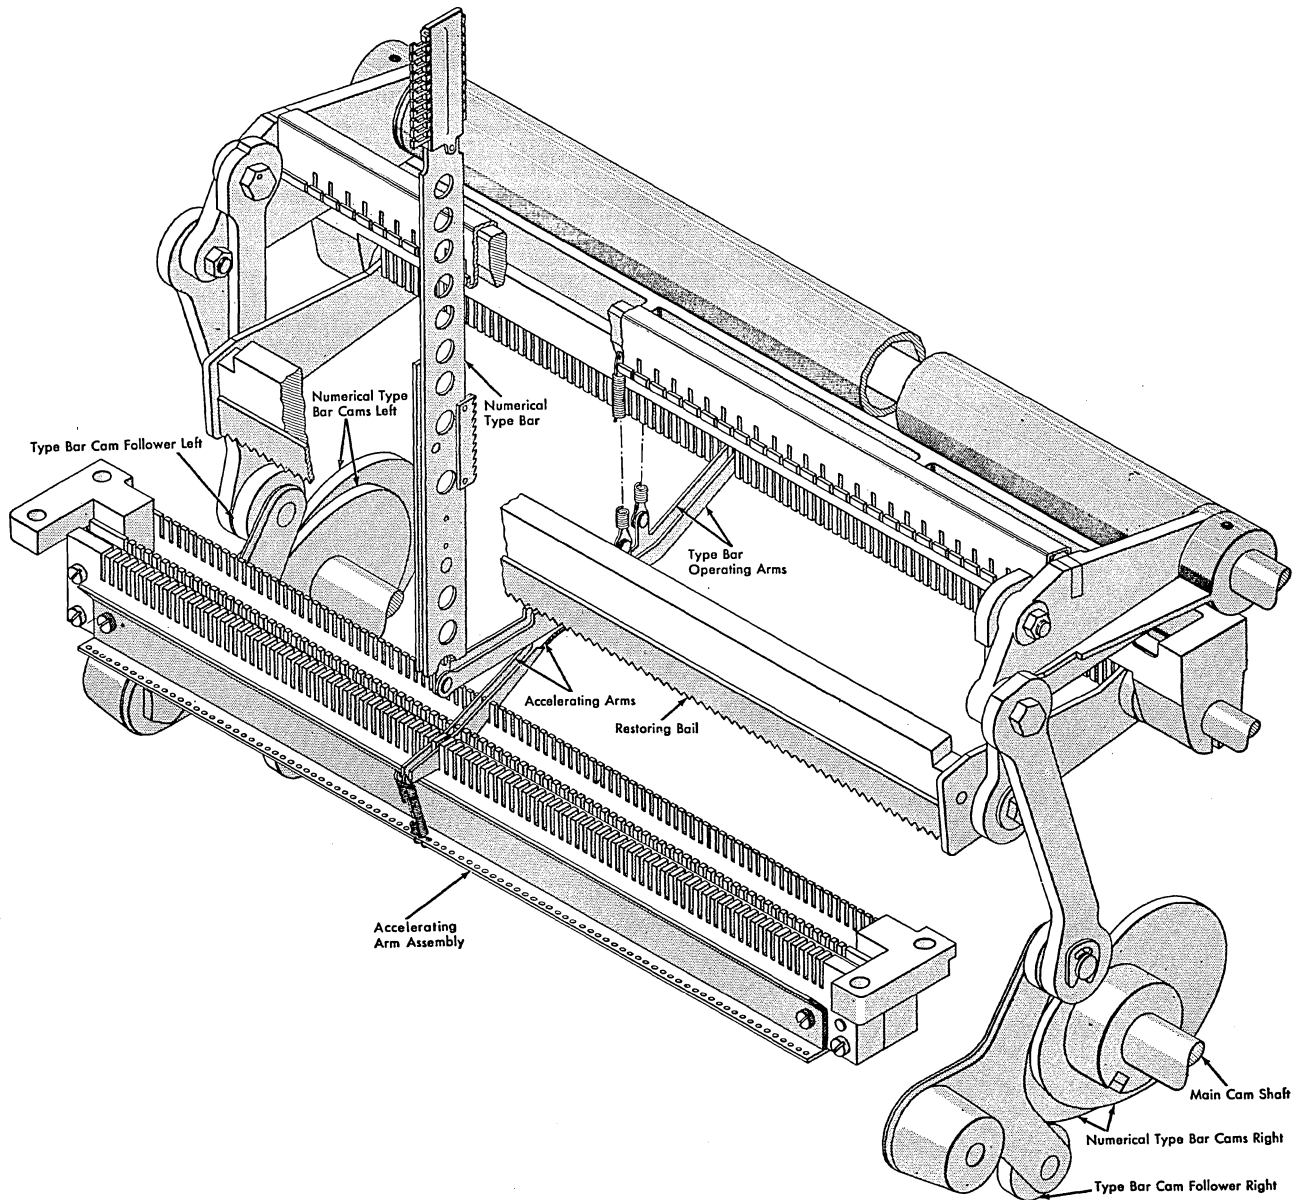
Numerical Type Bar Bail Assembly — Type 419
